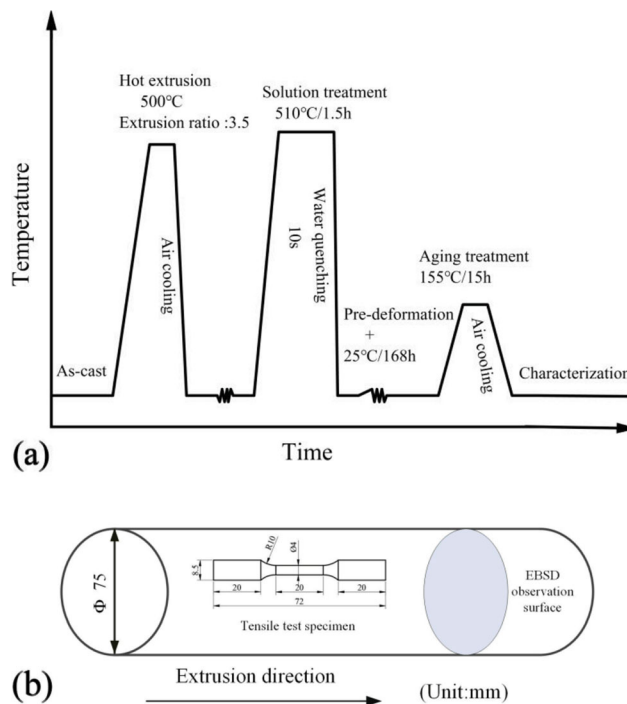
(a) Processing route of extruded 2198 Al-Li alloy bars and (b) dimensions and sampling locations of the tensile specimens after extrusion
